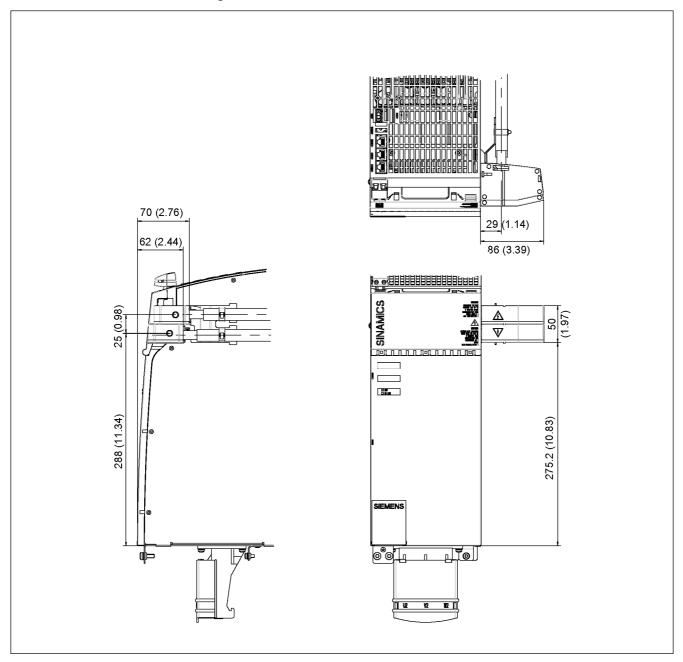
Dimension drawing, 150 mm components with DC link adapter for two-row configuration 35 mm² to 95 mm²
